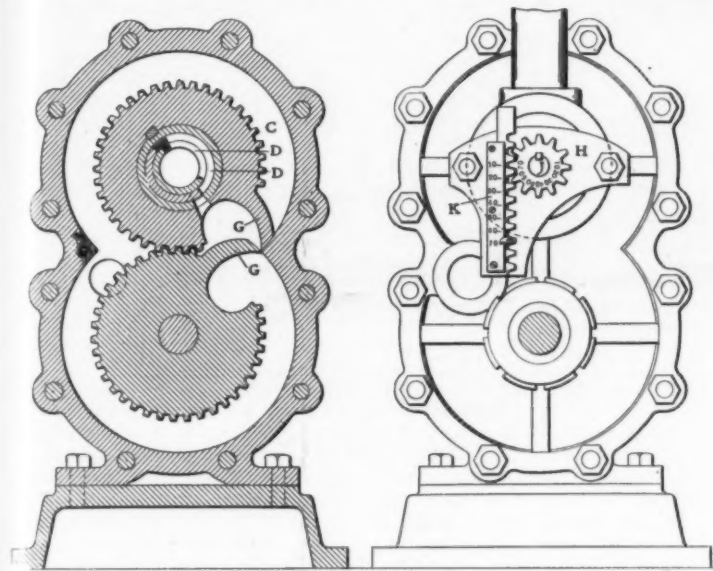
TRANSVERSE SECTIONAL VIEW OF KNOWLES ENGINE.
